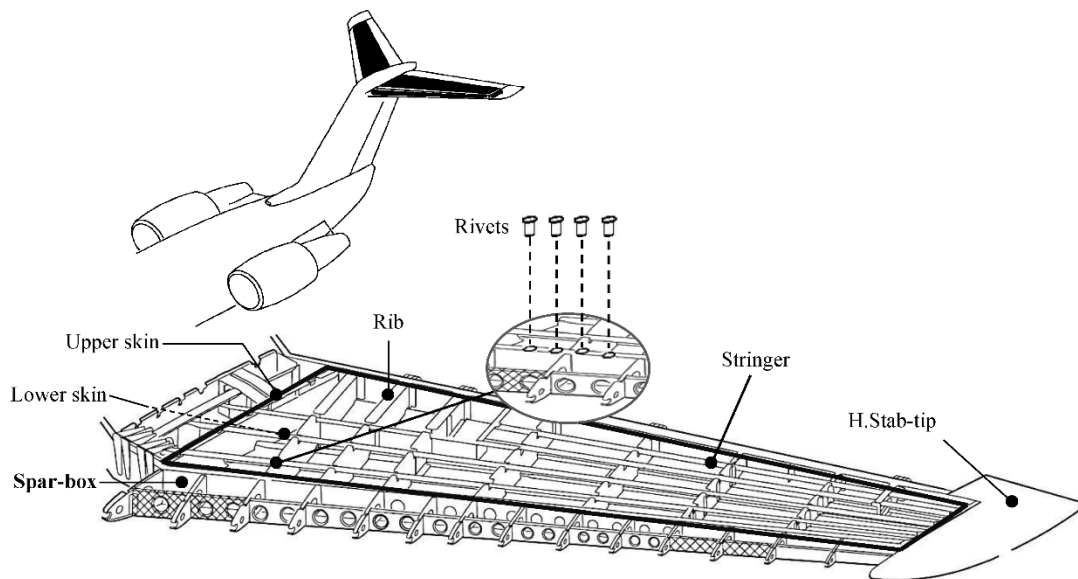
Horizontal stabilizer structural elements; the rivets are shown in magnified view
